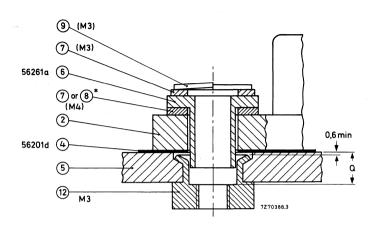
Assembly (partial) for Fig. 10 - insert nuts Q minimum 2,5 mm.
